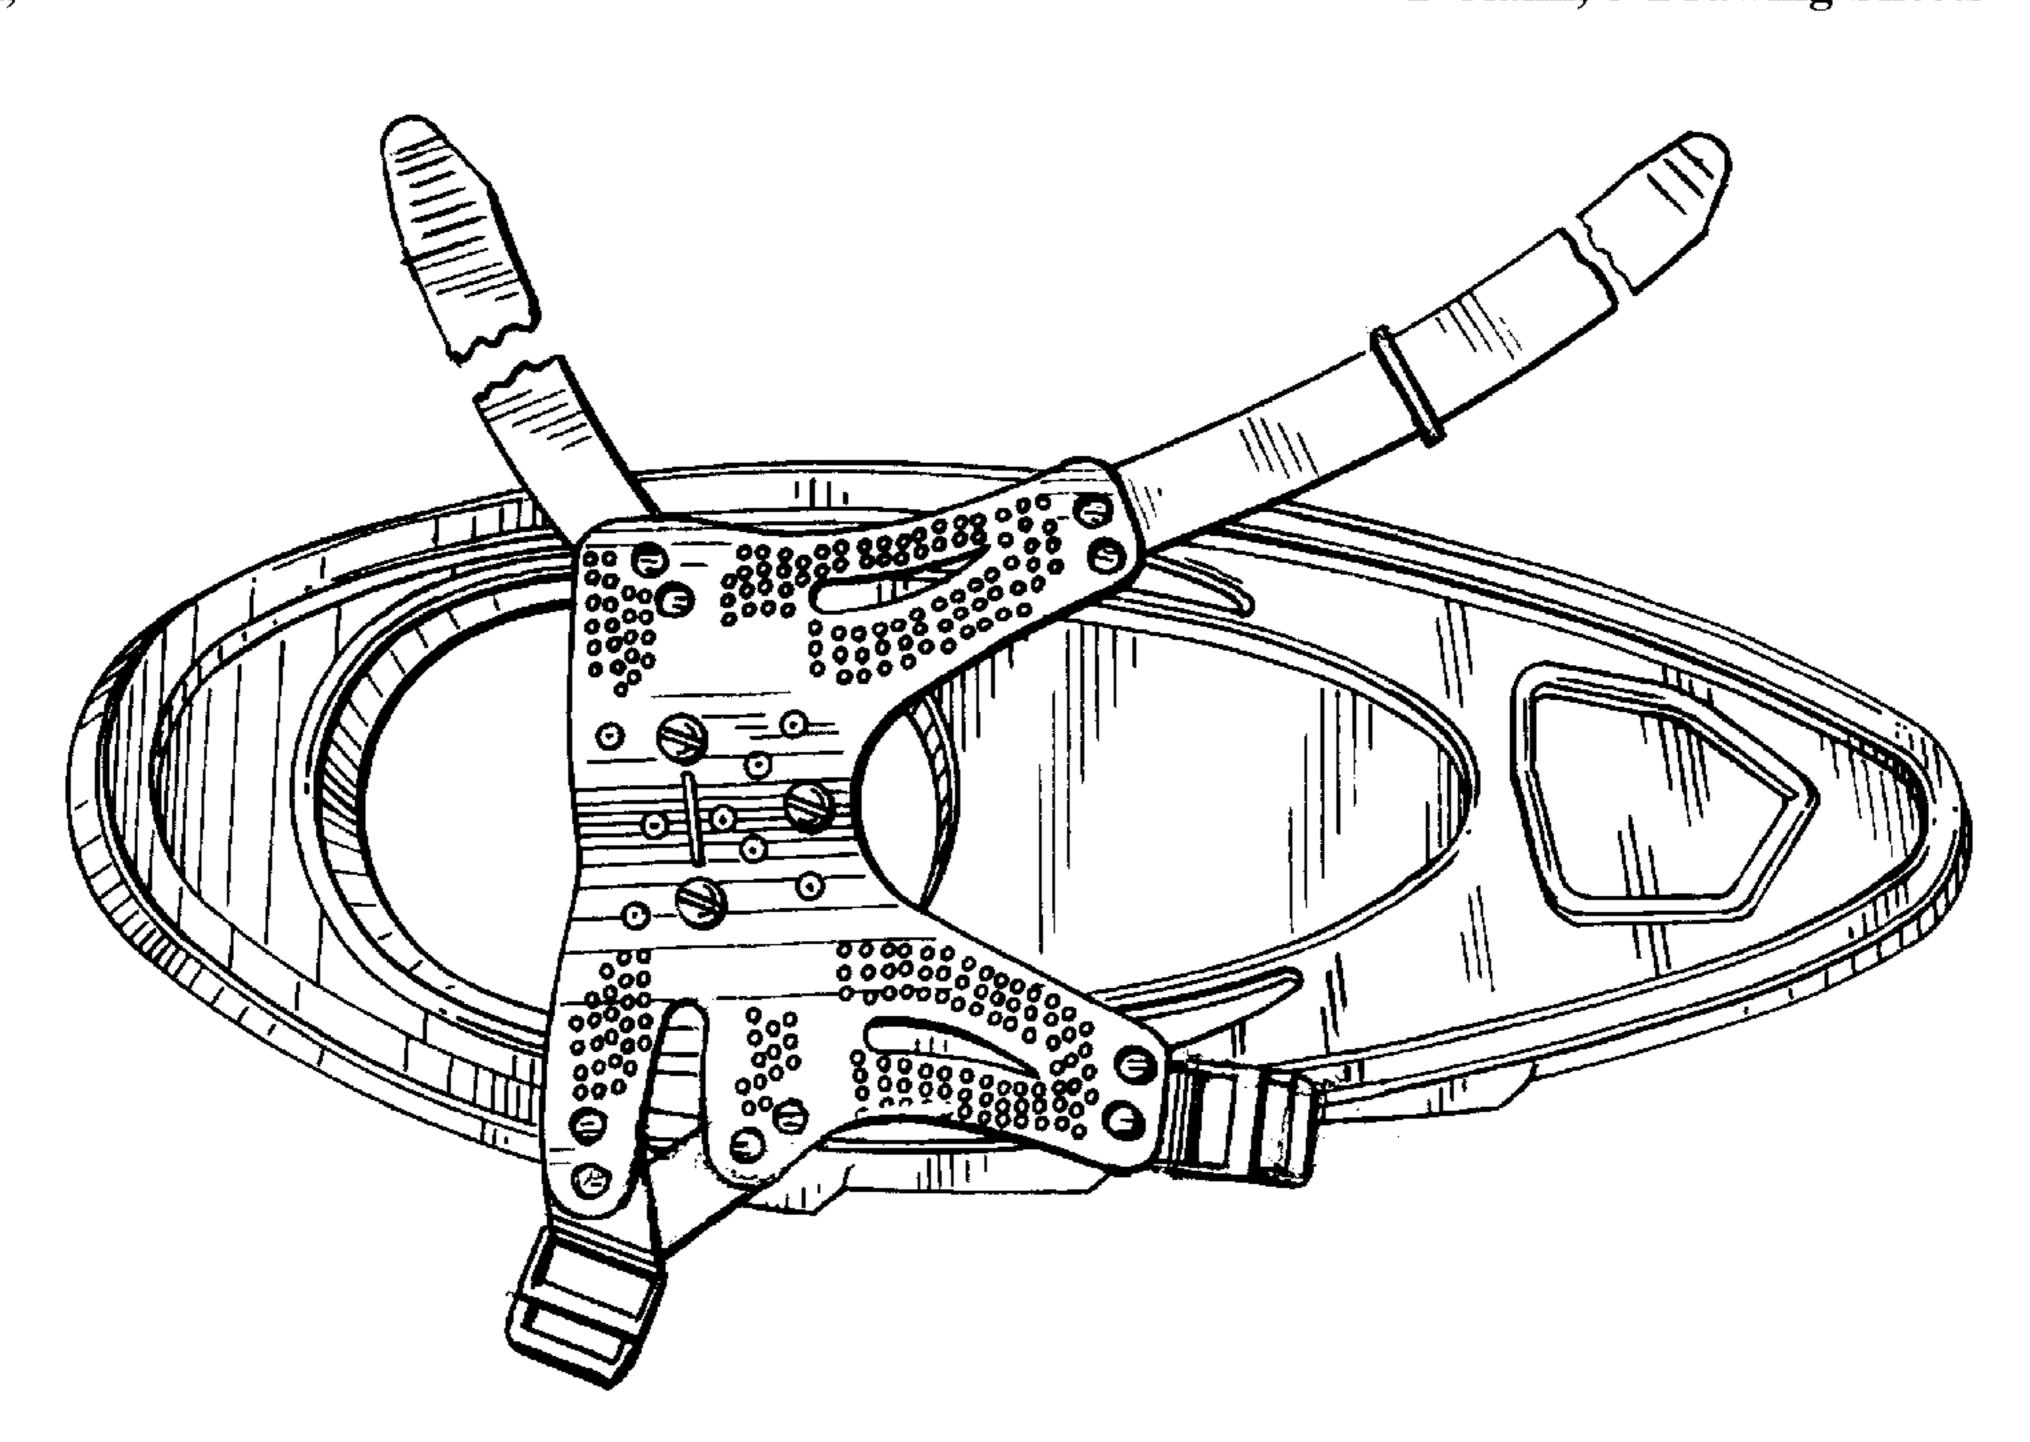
is a bottom perspective view of the crampon of the molded snowshoe of the invention;
